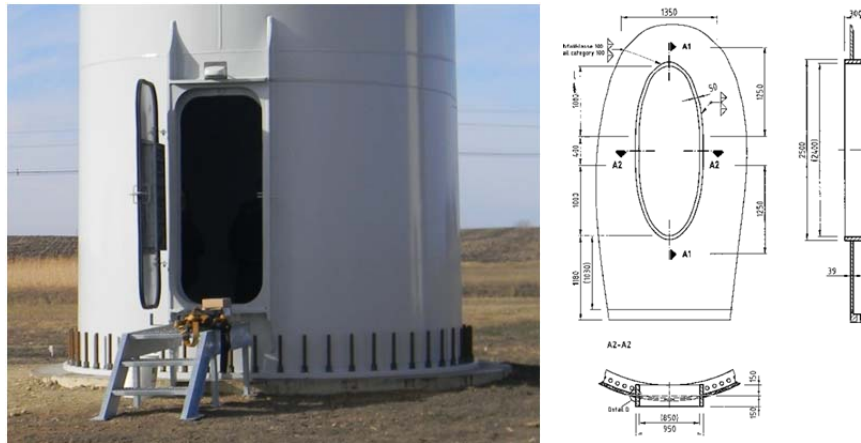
Typical layout of the door opening in the lower segment of the tower shell.
